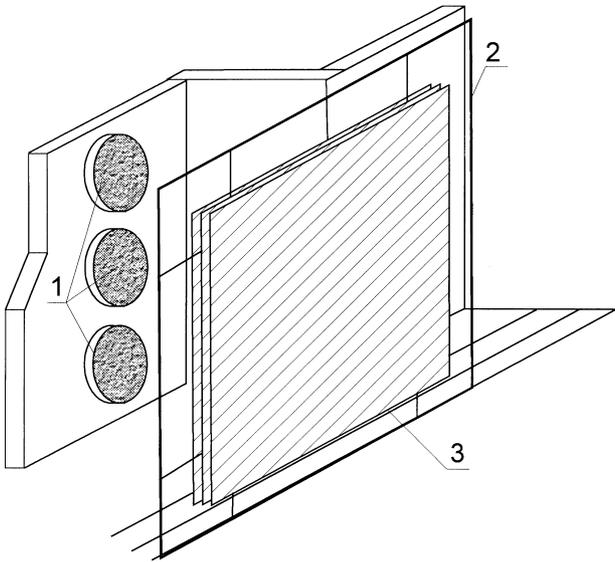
Scheme of the industrial configuration for glass decorative coating: (1) Metallic cathodes, (2) mobile frame, (3) glass sheets mounted back to back.
